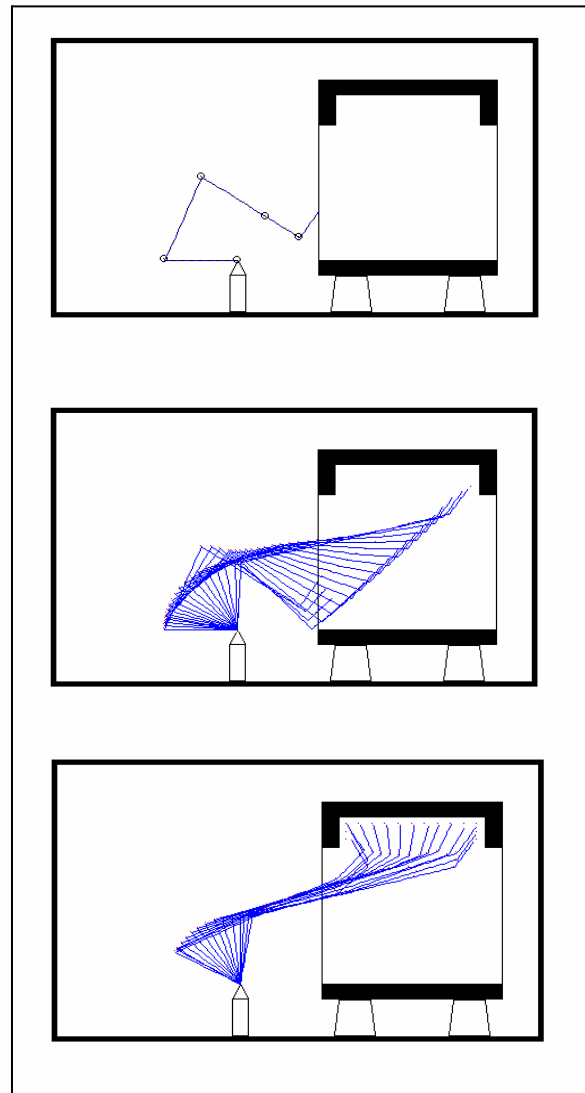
Initial arm design performing welding task inside unibody.
